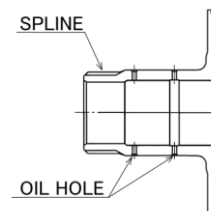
Front carrier sleeve (FR CARR SLEEVE)
